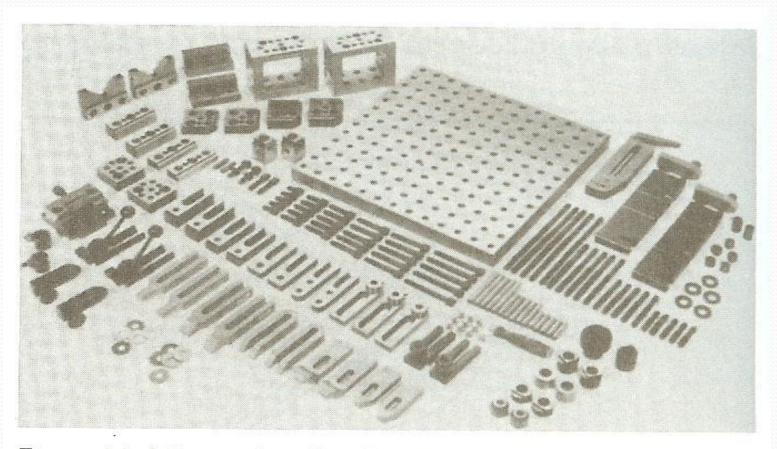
Starter kit of modular fixturing components. (Courtesy Fritz Werner Machine Tool Corp.)
